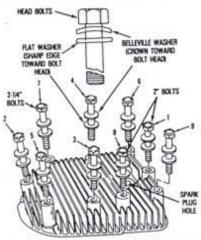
Flat washers and Belleville washers are used on cylinder head cap screws on late HH80, HH100 and HH120 and all VH80 and VH100 engines. Tighten cap screws in sequence shown to a torque of 200 in.-lbs. (22.6 N·m).
